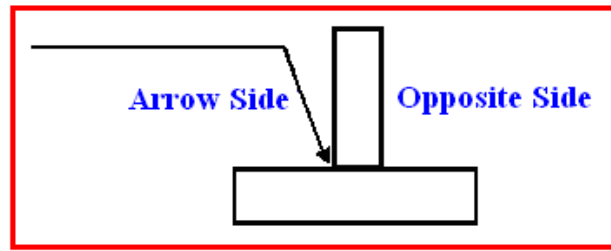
Arrow side and opposite side in welding symbol
